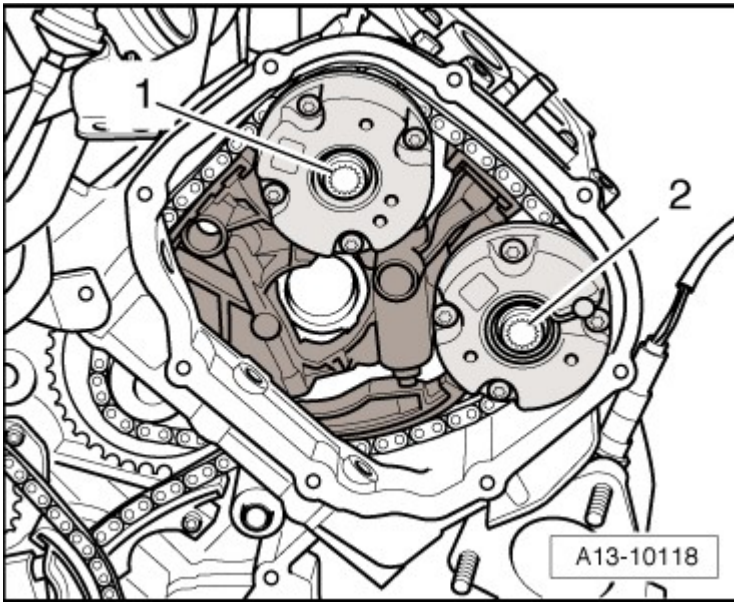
Identifying Bolts For Camshaft Adjuster Using Multipoint Socket T10035
